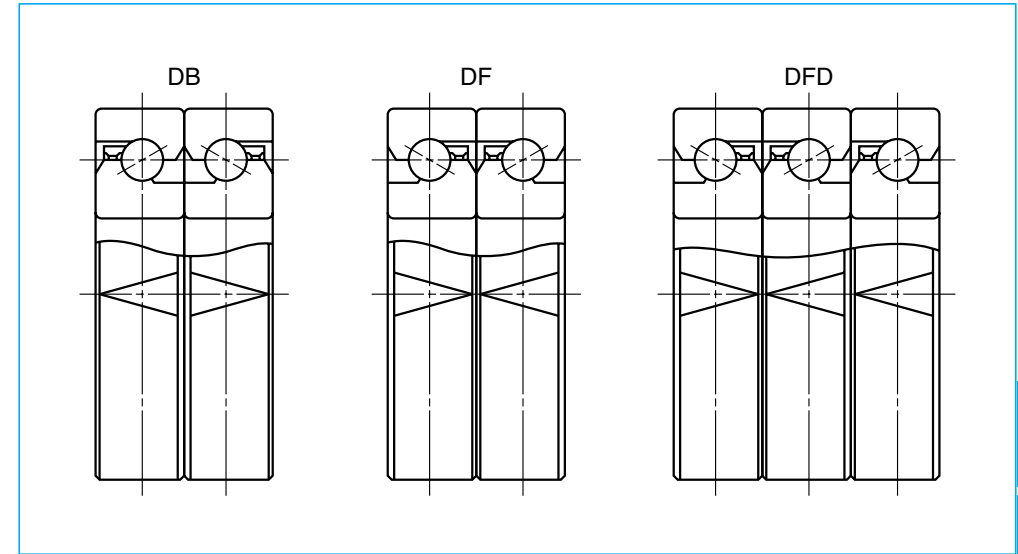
Example of universal combination (SU) and "V" mark
